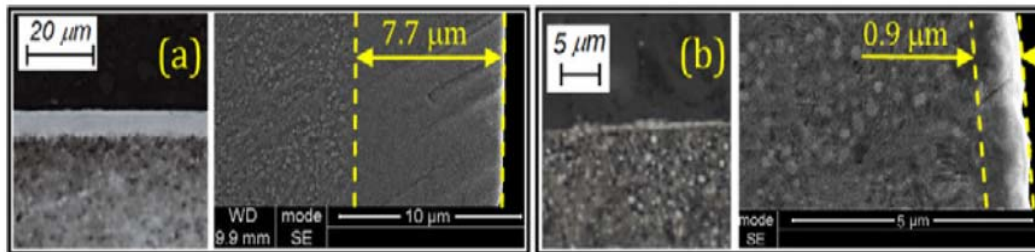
White layer formed under machined surface in (a) dry and (b) cryogenic machining (Umbrello *et al.*, 2012).
